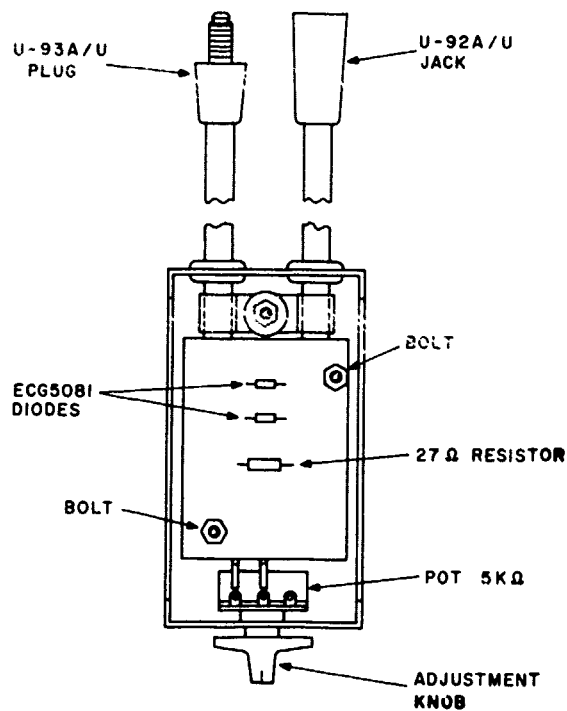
EXPLODED VIEW OF THE MODIFIED WIRING FOR THE MINIATURE RECEIVER.
